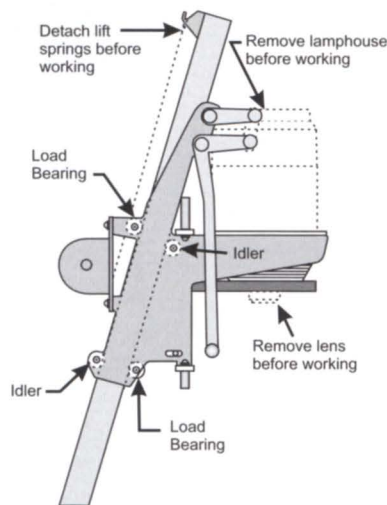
Replace the plastic bushings located in positions marked "Load Bearing" and "Idler" using smooth-acting roller bearings and bronze bushings.
